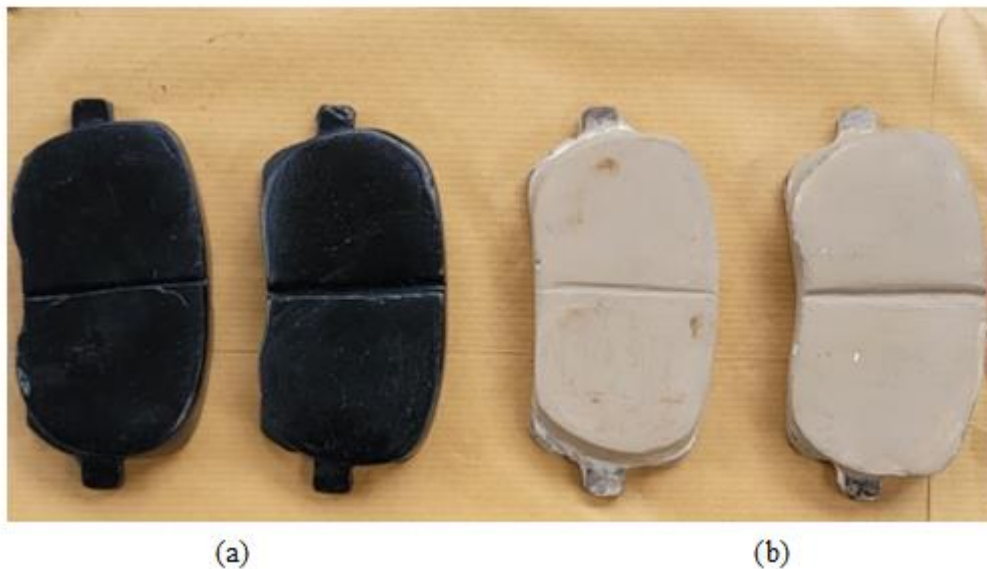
Photographs of the Developed Brake Pads Showing (a) PSP/CSA (b) PSP/K Brake Pads
